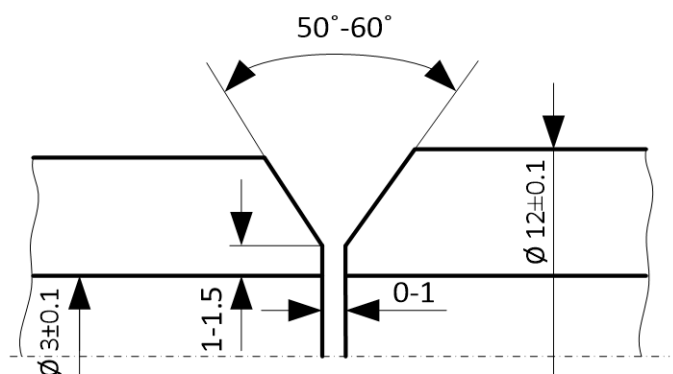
Single 'V' butt joint used in the first case of welding reconditioning
